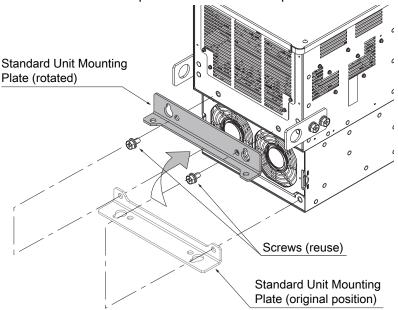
Remove Top Mounting Plate and Reattach in New Position
